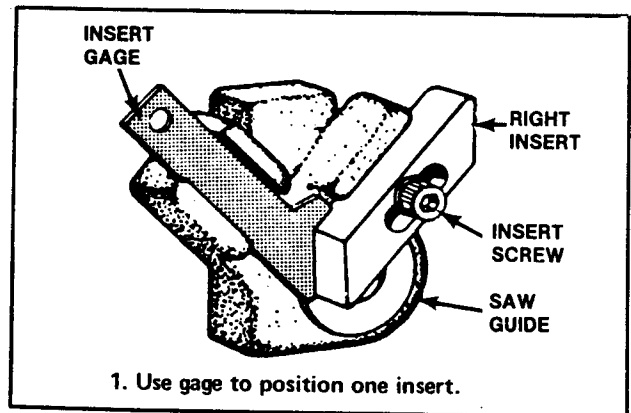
POSITIONING RIGHT INSERT. UPPER GUIDE BLOCK SHOWN.
